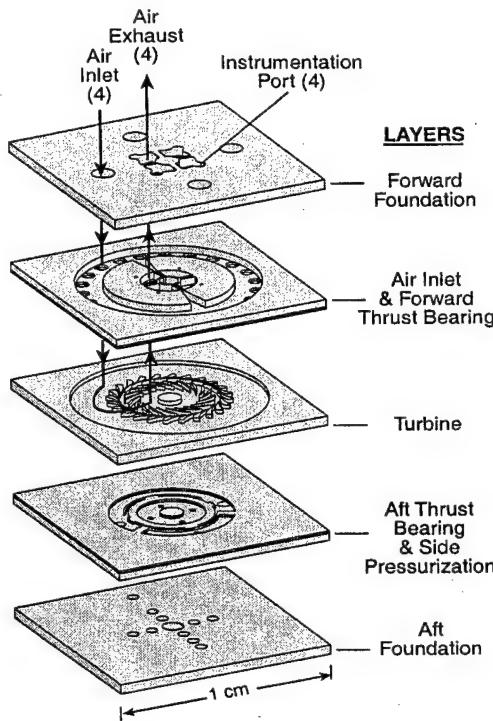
Exploded view of five layers comprising the turbine bearing rig.
